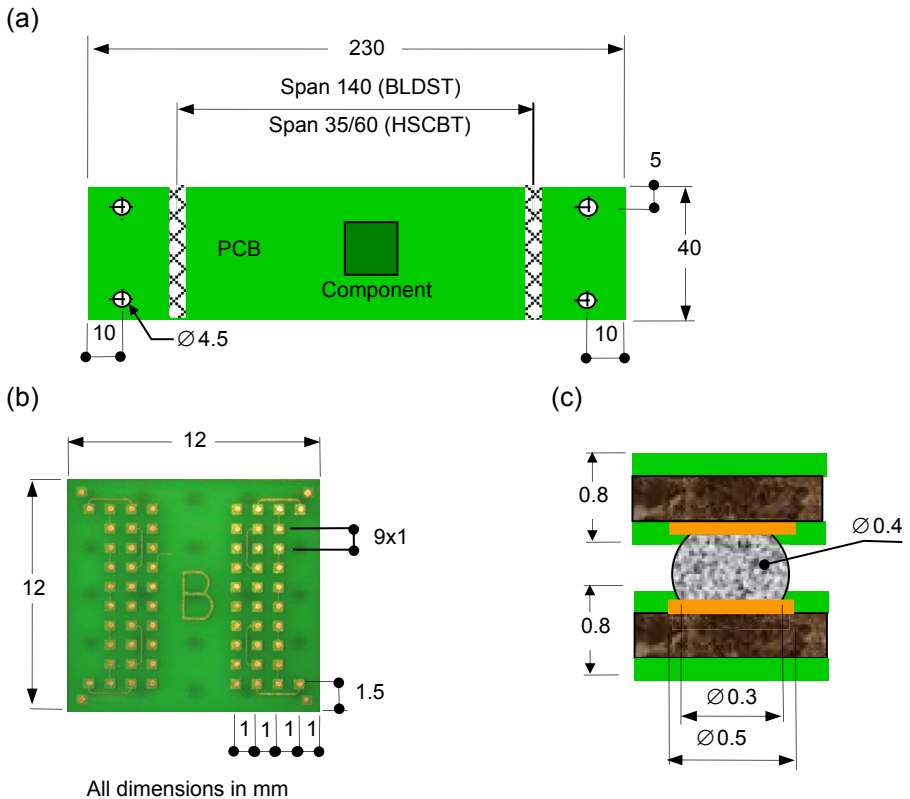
Test specimen: (a) PCB; (b) IC component; and (c) solder joint.
